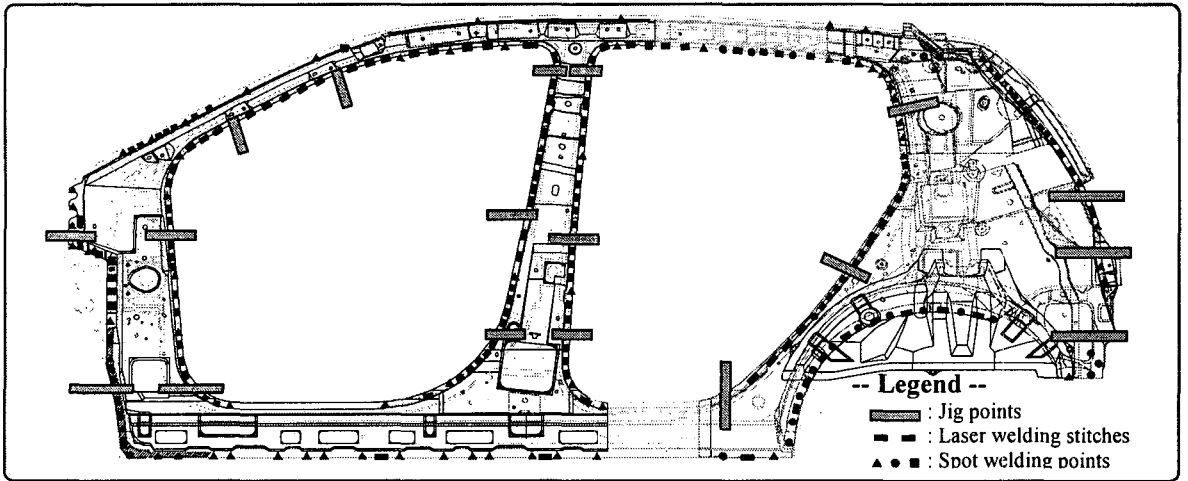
Generation of laser welding stitches, spot welding Points and jig points
